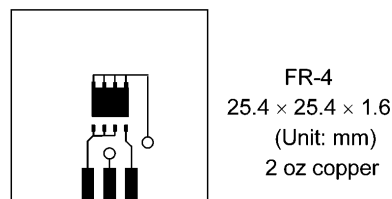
Device Mounted on a Glass-Epoxy Board (b)
